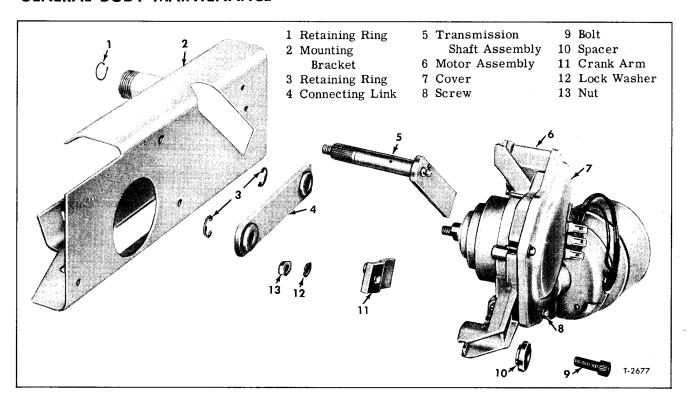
Wiper Motor and Bracket—Partially Disassembled
